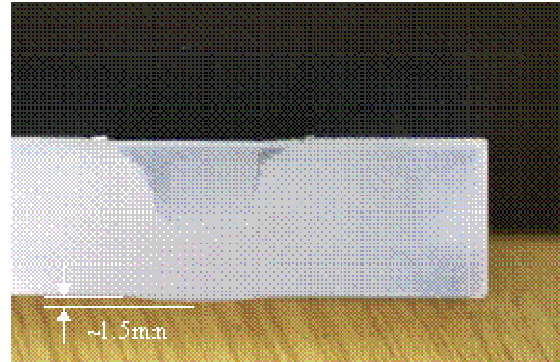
Weld produced using tool A indicating plastic deformation of rear face
